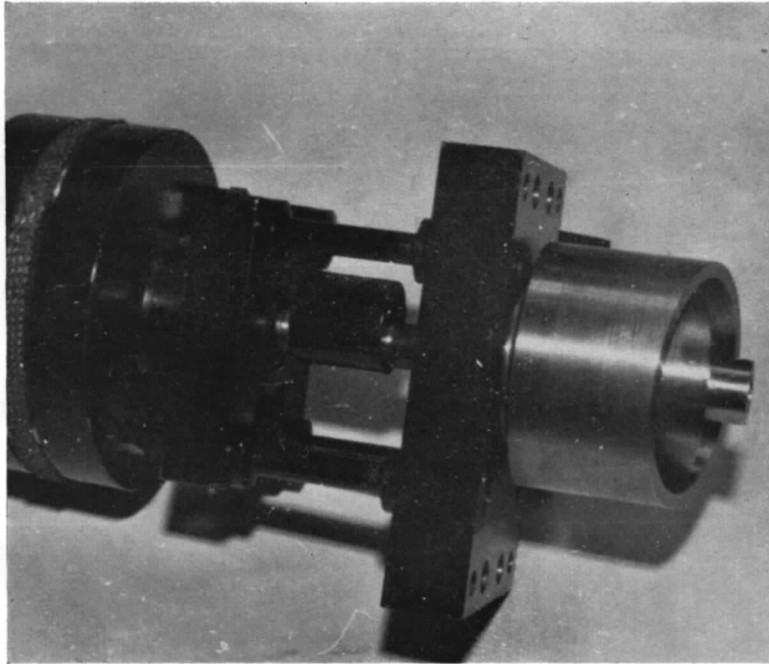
The driving assembly (Swash plates, eccentric interruptor and flexible coupling).
